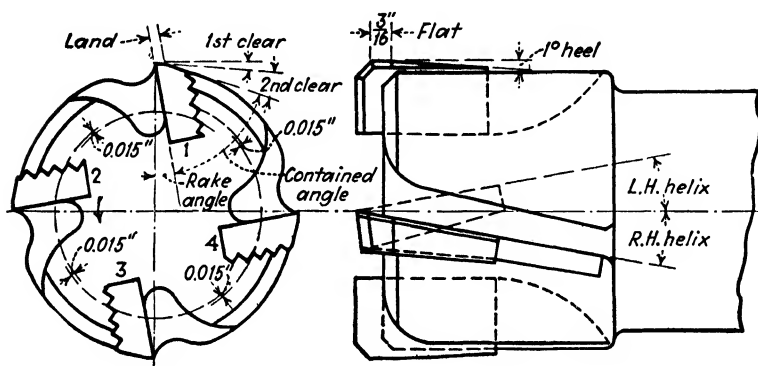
Cutting and clearance angles are shown on this adjustable reamer with offset serrations.
